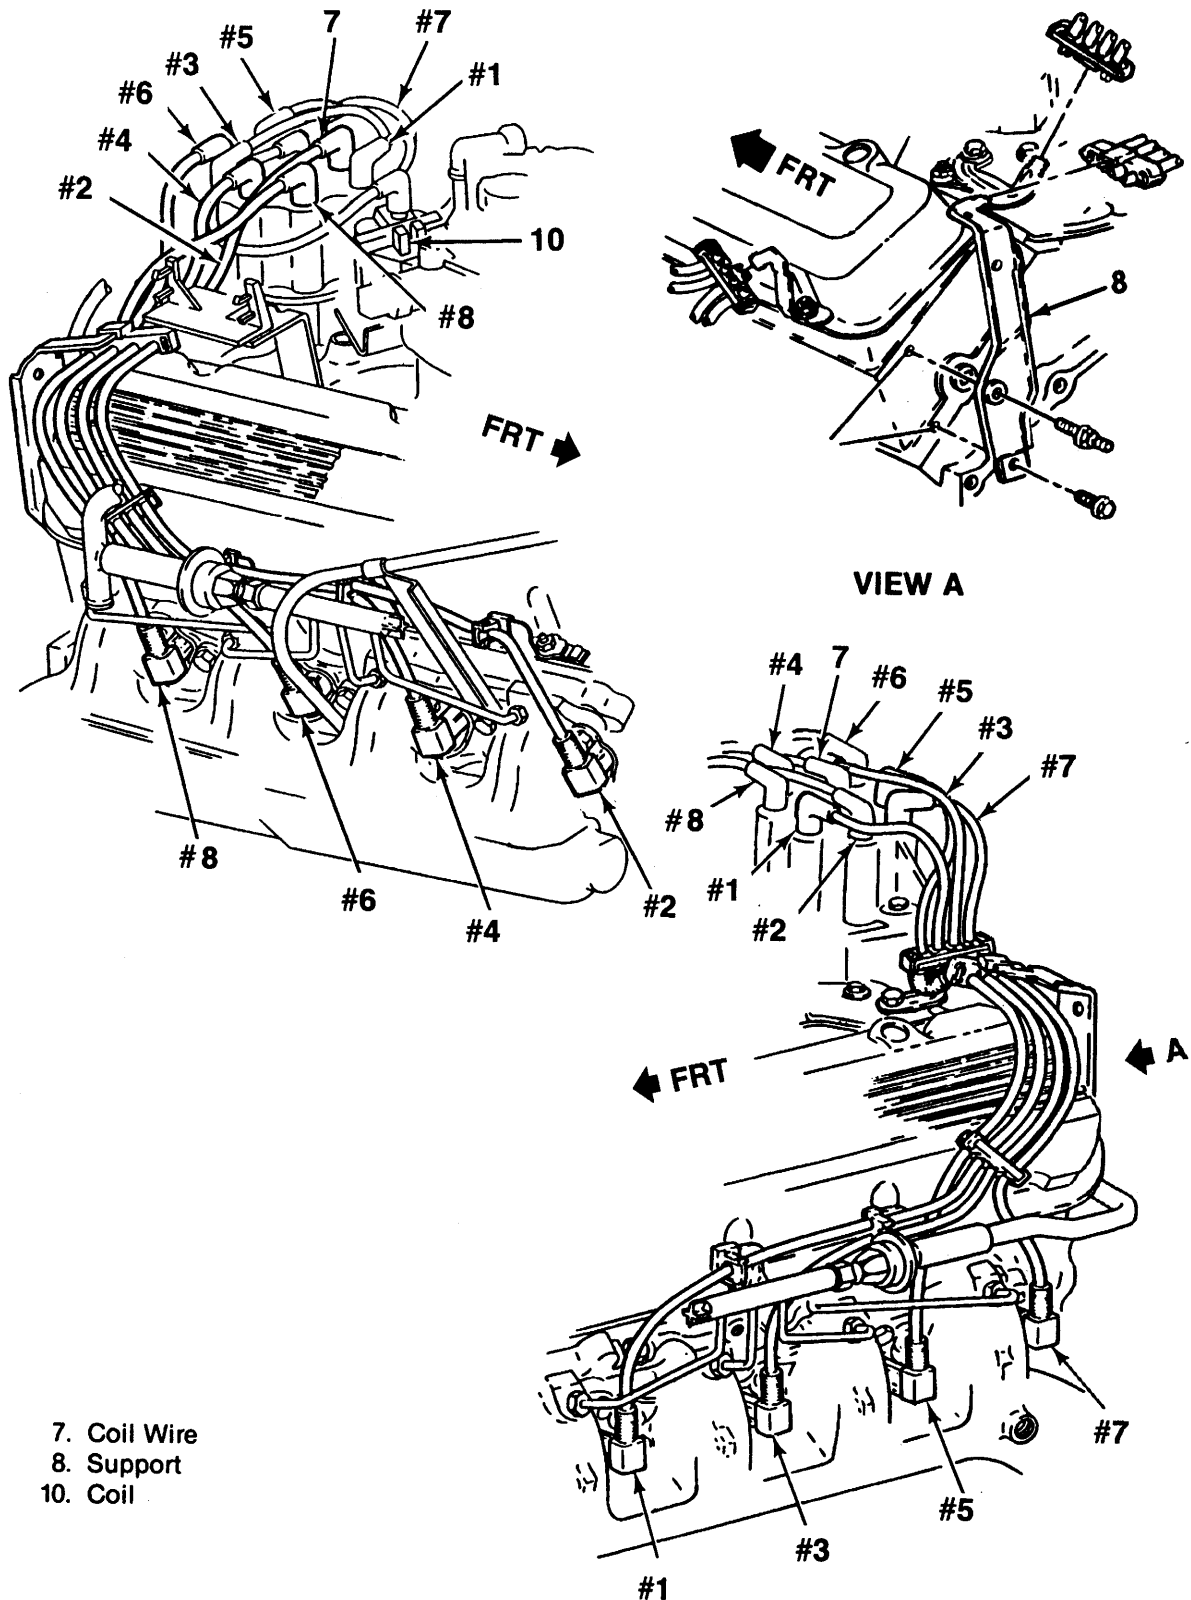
Spark Plug Wire Routing (7.4L Engine)
